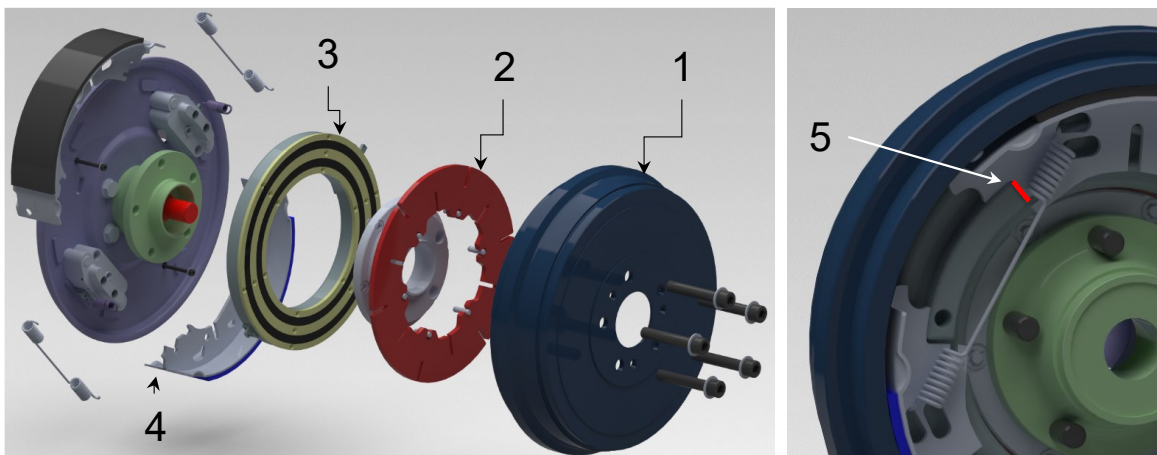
Magnetic hybrid drum brake exploded view and view towards the outside of the vehicle
